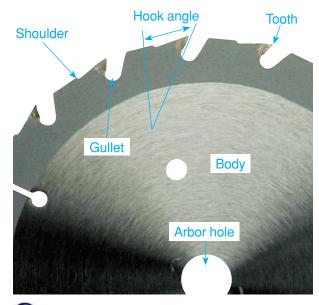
Circular Saw Blade Parts of a Blade The main parts of a circular blade. This blade has carbide-tipped teeth.
